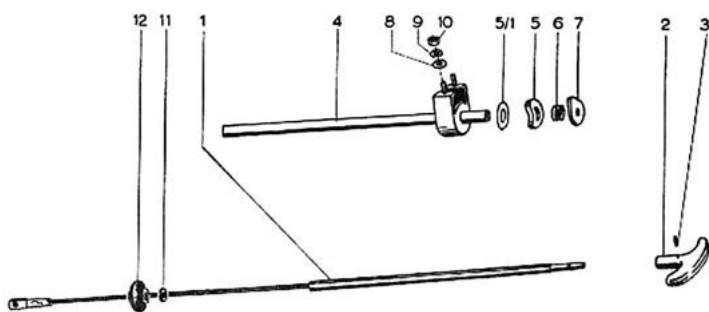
A breakdown of the main handbrake parts: 1) the hexagonal rod or "brake stick" and cable, 2) the handle, 3) a roll pin, 4) the guide tube, 5) the locking plate, 5/1) the locking plate washer, 6) the pressure spring, 7) the stop plate, and 12) the rubber guide boot.
